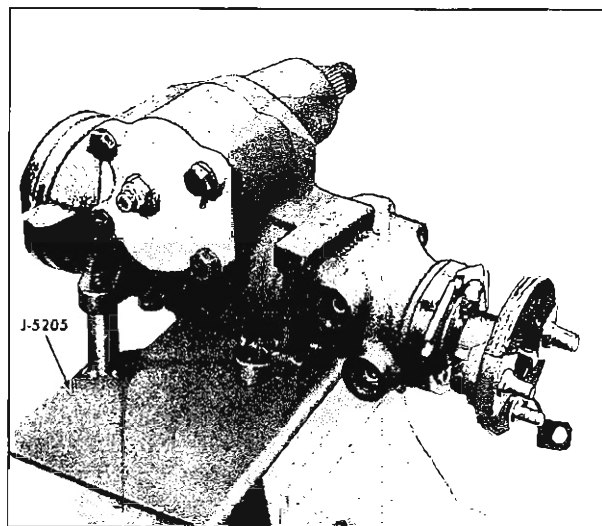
A-6 Steering Gear Mounted on Tool J-5205
